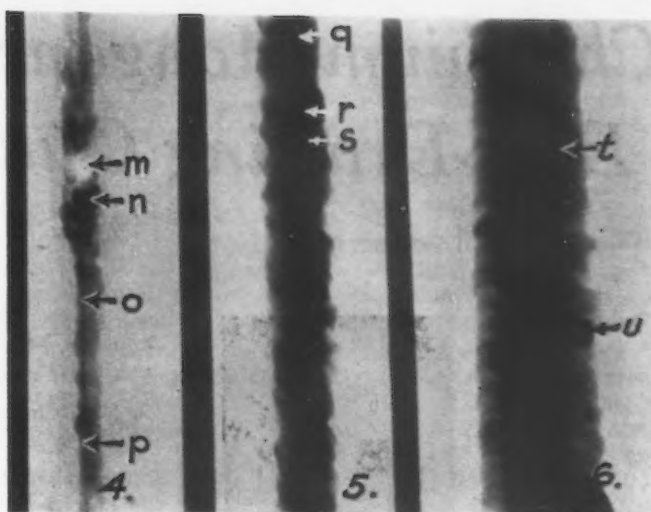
A Group of Three Defective Steel Welds
